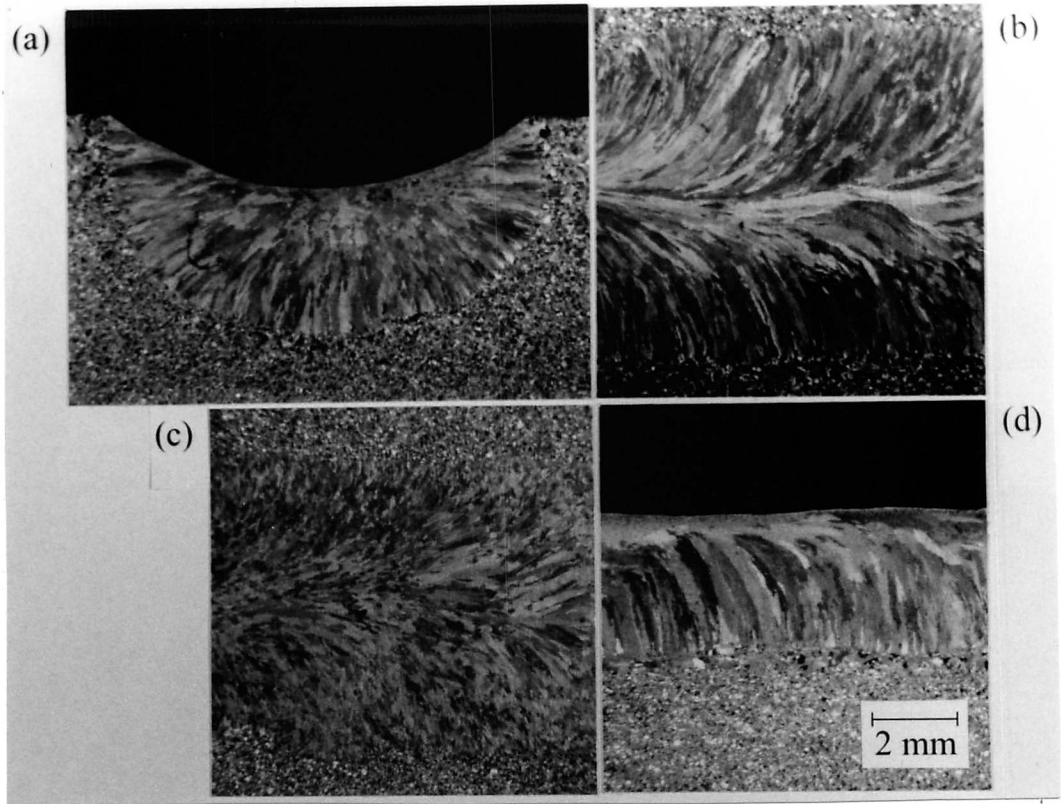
Microstructure of the TaN inoculated weld. (a) Transverse profile, (b) plan view 100 μm below weld surface, (c) plan view 1 mm below weld surface and (d) section along the weld centreline.
